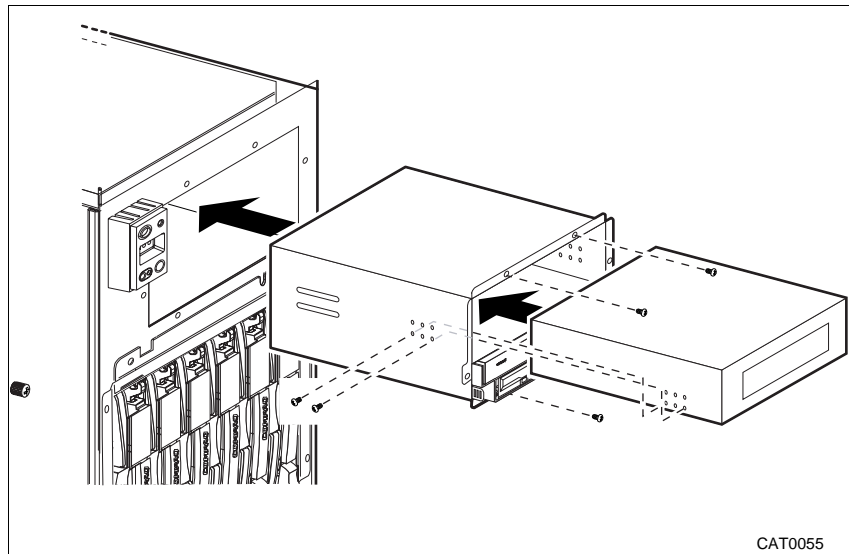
Installing a Tape Drive In to the Removable Media Bay
